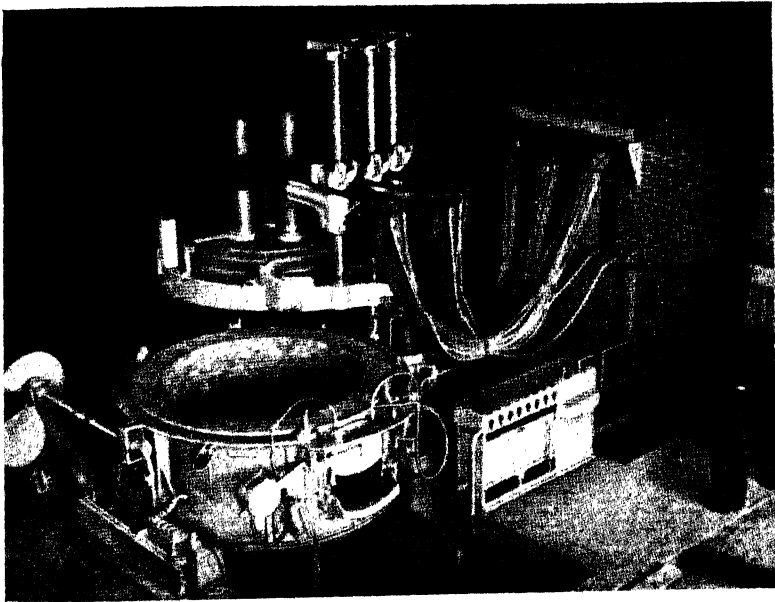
A 6-8-ton Electric Direct Arc Furnace. Top charging type, open for charging.
